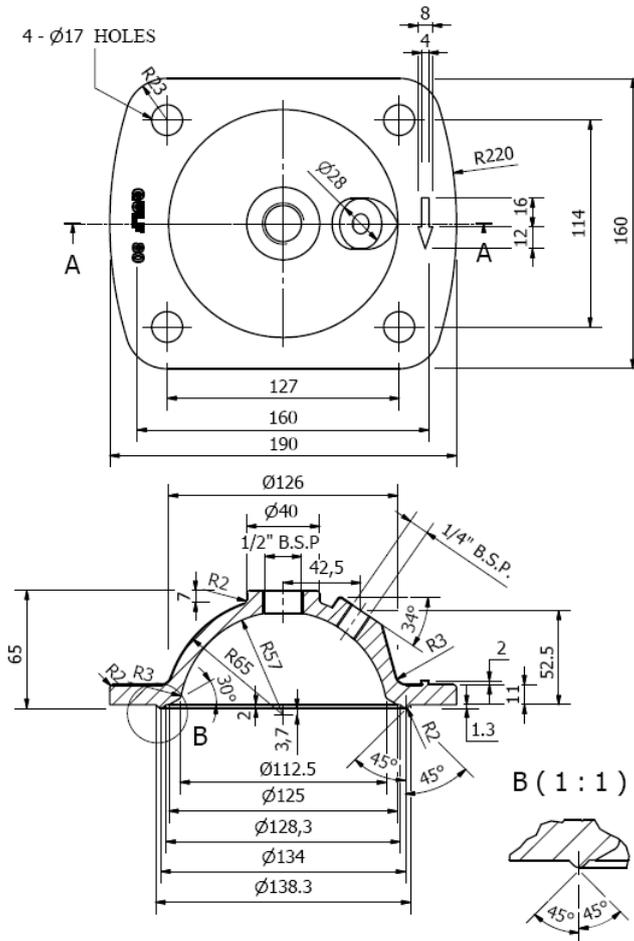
Two dimensional drawing of the steel bonnet to be produced using the pattern to be manufactured by RCT
